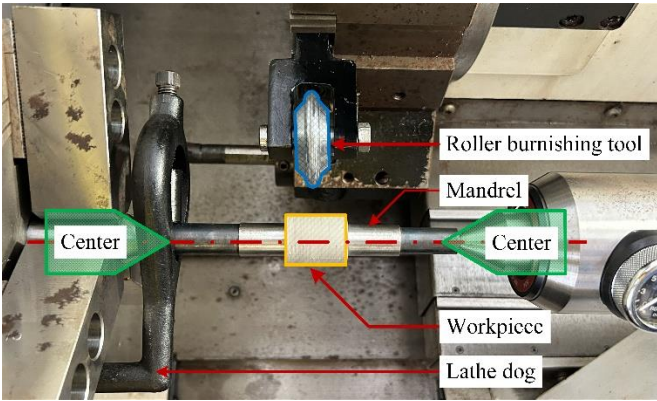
Experimental set-up of the roller burnishing process, showing the roller burnishing tool, cylindrical workpiece, and supporting fixtures (lathe dog, mandrel, and centers).
